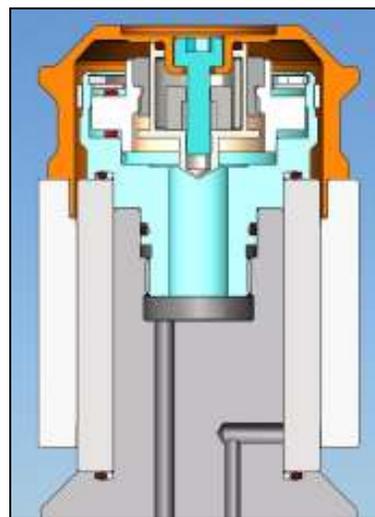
Picture of the 20 cm<sup>2</sup> area piston-cylinder
